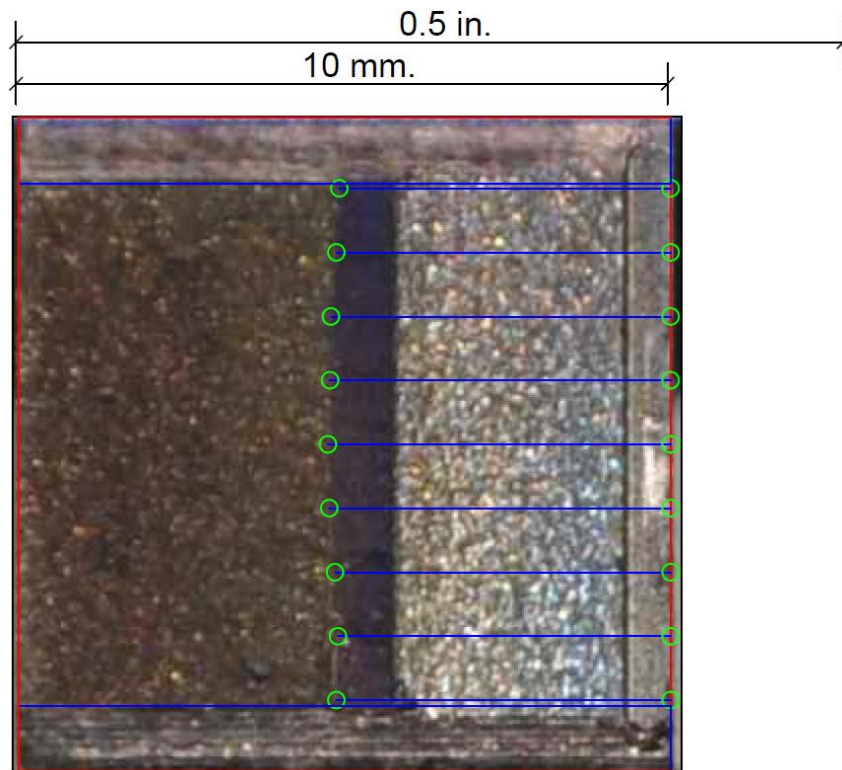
Specimen A6' Fracture Surface
